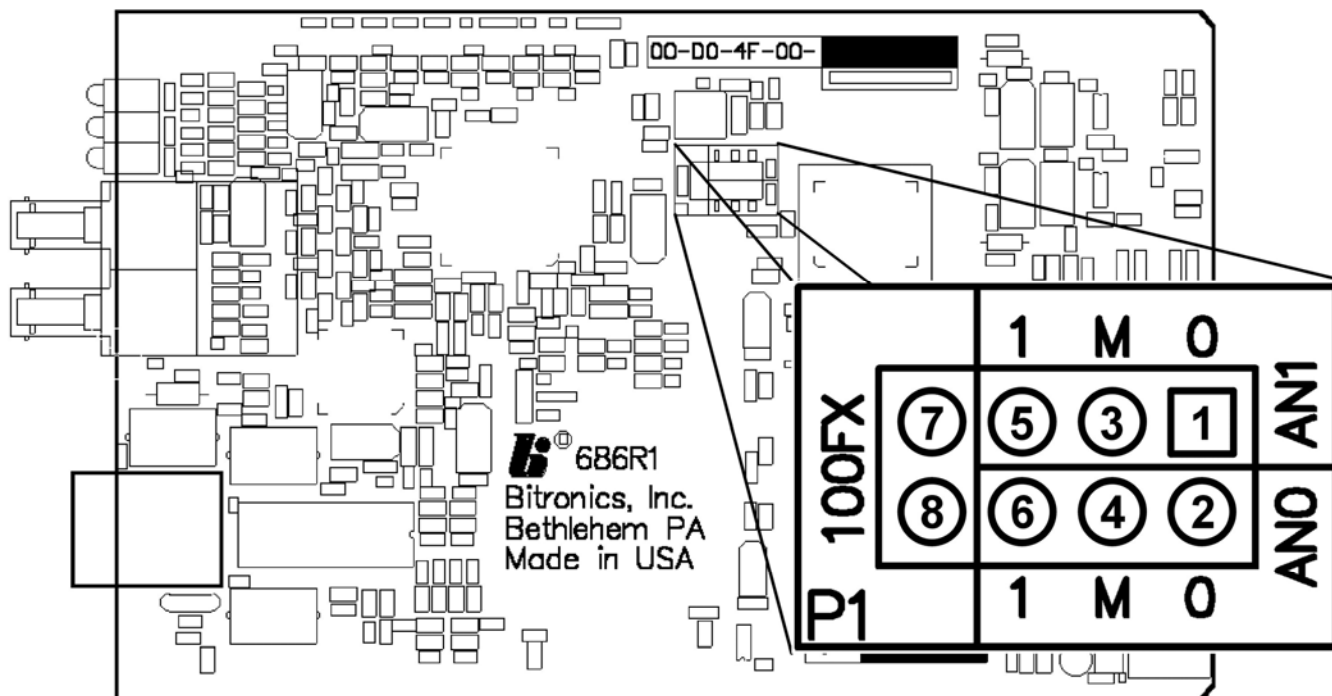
Ethernet Board Jumper Locations (Rev 1 and Later Boards)
